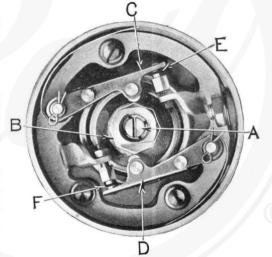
Timer Contacts, Distributor Cap and Rotor Removed.
